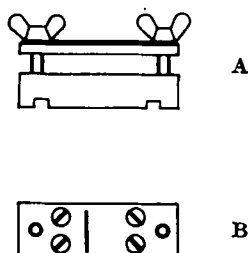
Diagram of cantilever attachment for the bending platform. A. Front view showing slots for track. B. Top view of lower half of attachment showing an alignment wire that facilitates seating of the specimen.
